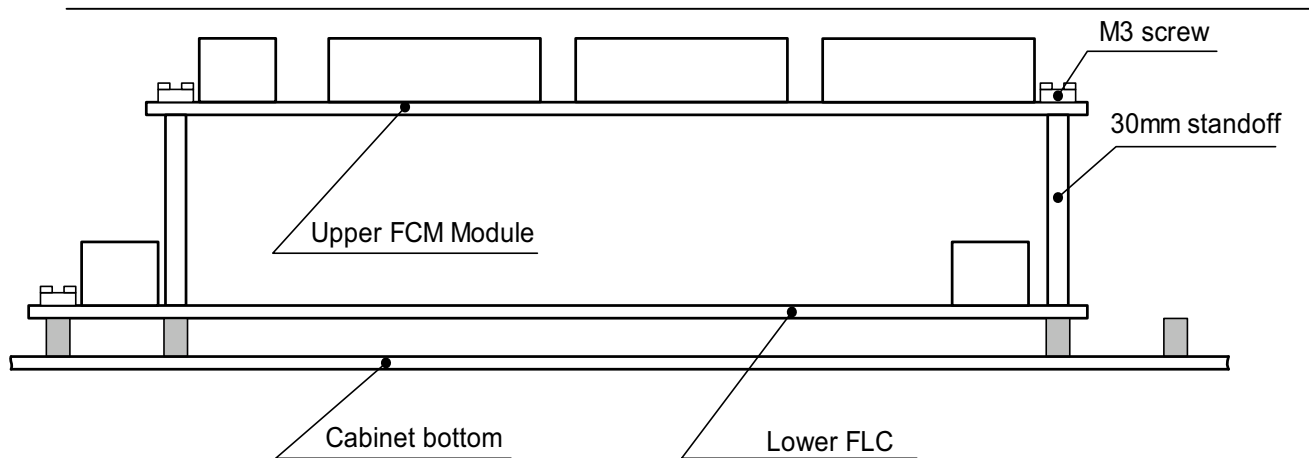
Optional conventional (FCM) module mounting in the Main Cabinet (side view).
